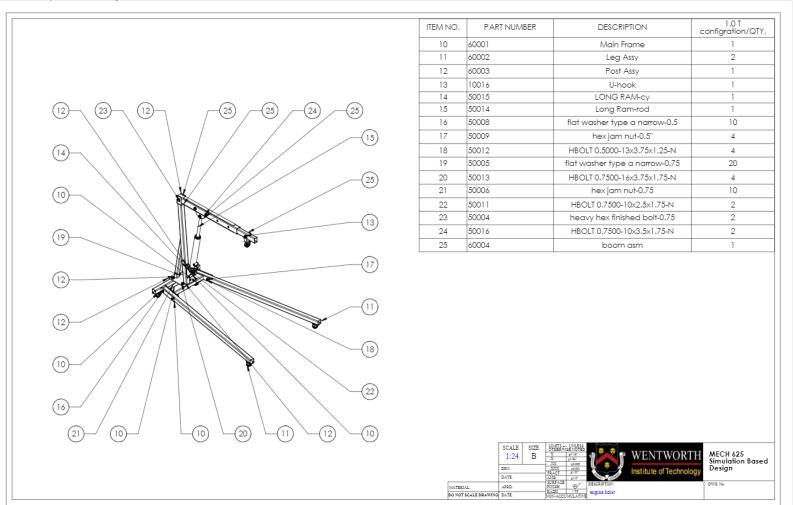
PN#60005 Full Assembly Redesign Drawing with BOM
